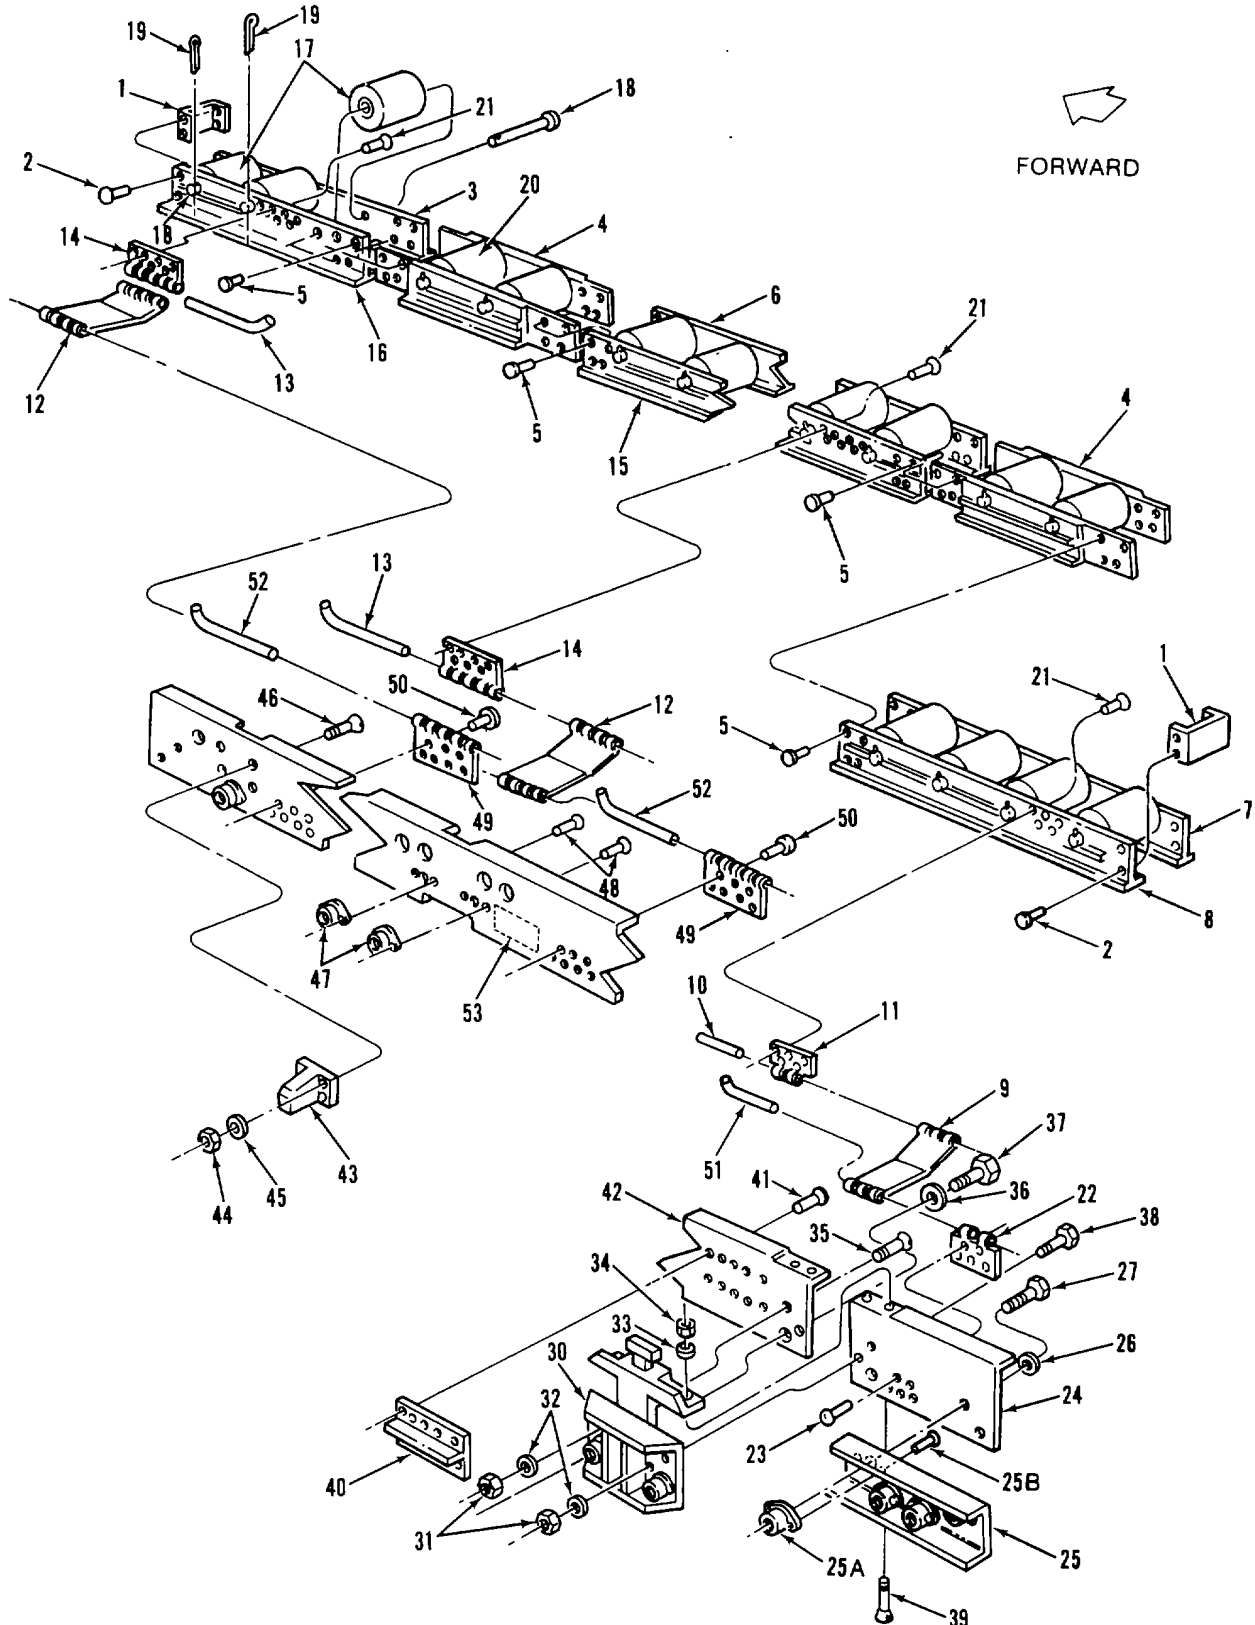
Outboard Rail/Roller Assembly, Stations 272.531 to 374.000
